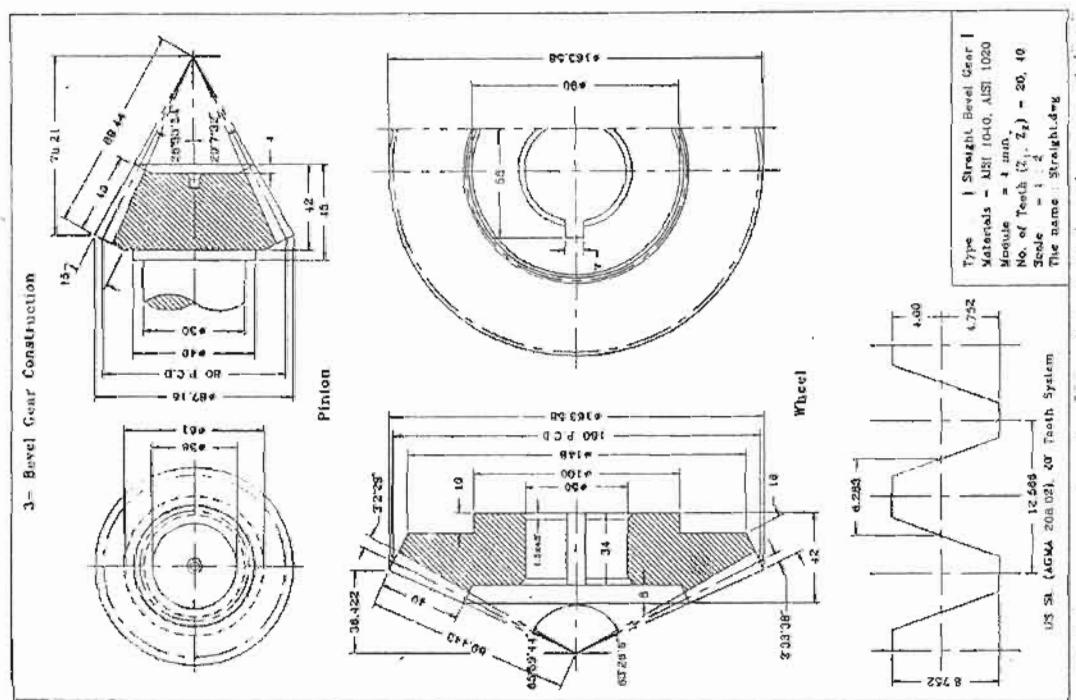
Construction drawing of straight bevel gears pinion and wheel for 25 Kw power, 750 rpm input speed, 2 gear ratio and 90° shaft angle.
